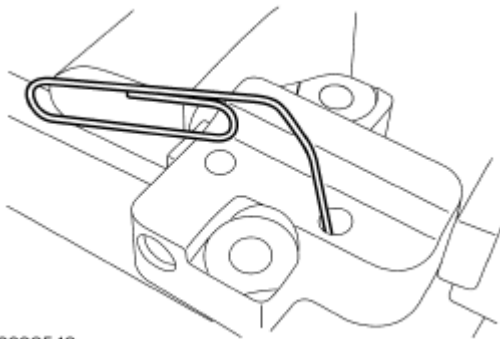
Identifying Paper Clip Into Hole In Tensioner Housing
